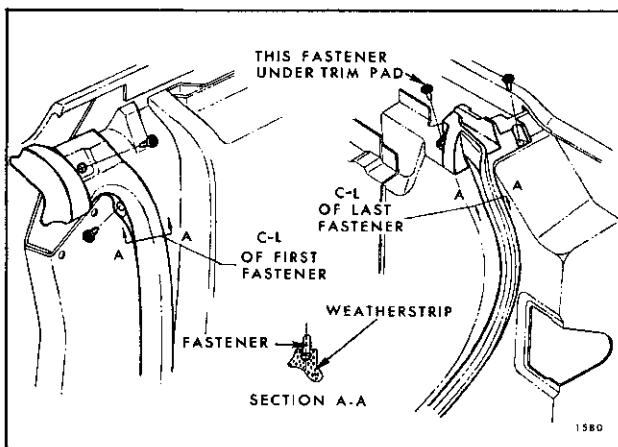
Door Weatherstrip — Attachment Under Trim Assemblies
